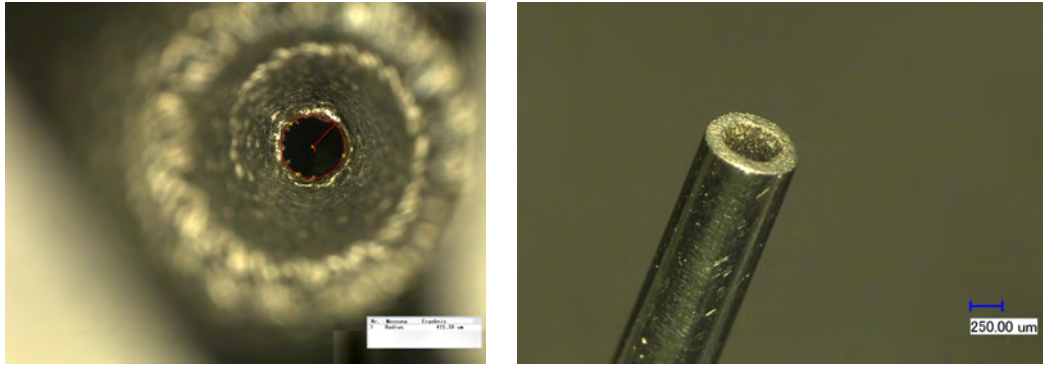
Frontal view of the screw (left) and photo of the capillary tube (right)
